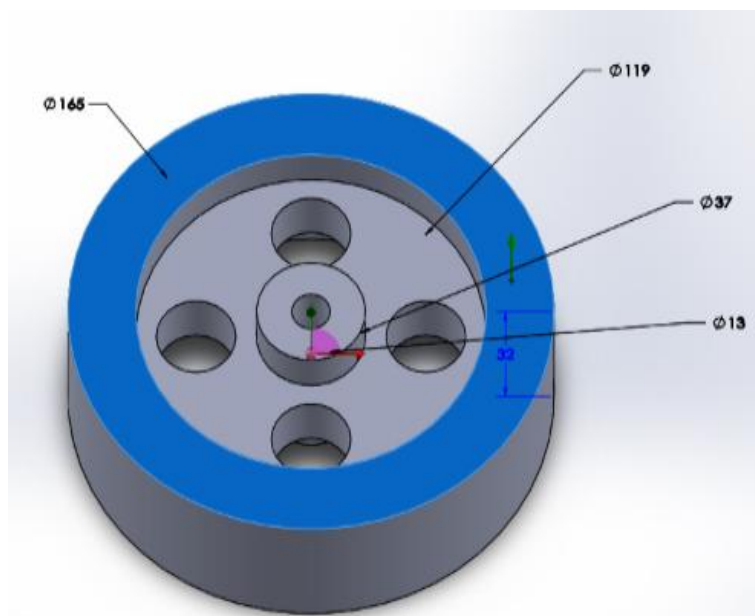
CAD design of Flywheel (all dimensions are in mm)
